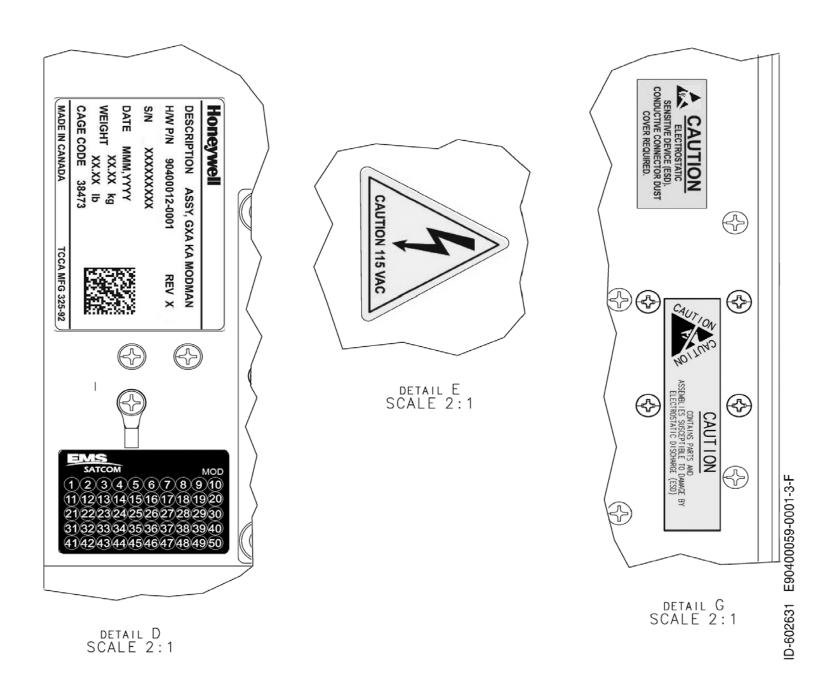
(Sheet 3 of 4) Modman Outline and Installation Drawing (90400059-0001, REV F)
